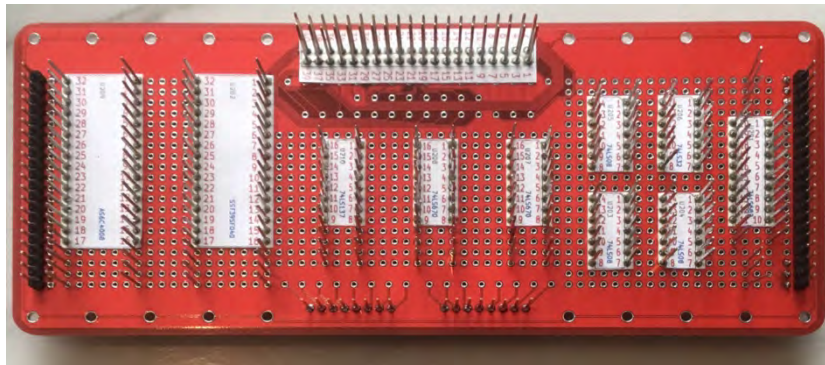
BACKSIDE OF THE NON-WIRED PROTOTYPE BOARD
